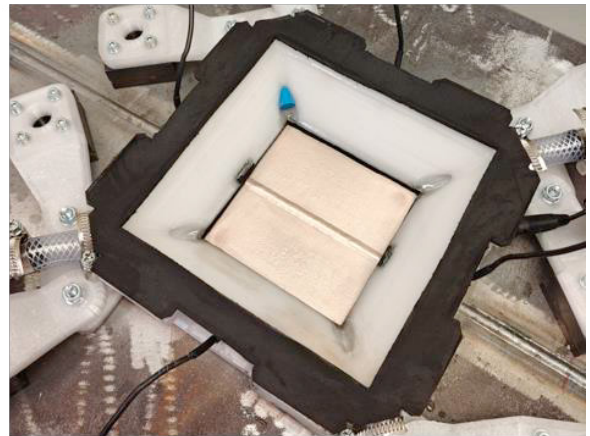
Successful coating of a butt-welded double V-seam with NMM.
